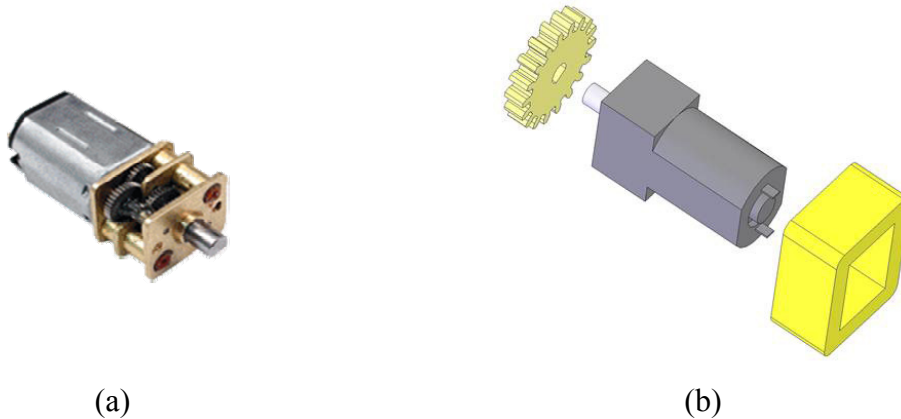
Miniature gearhead motor (a) and the motor/insert/gear subassembly (b).
